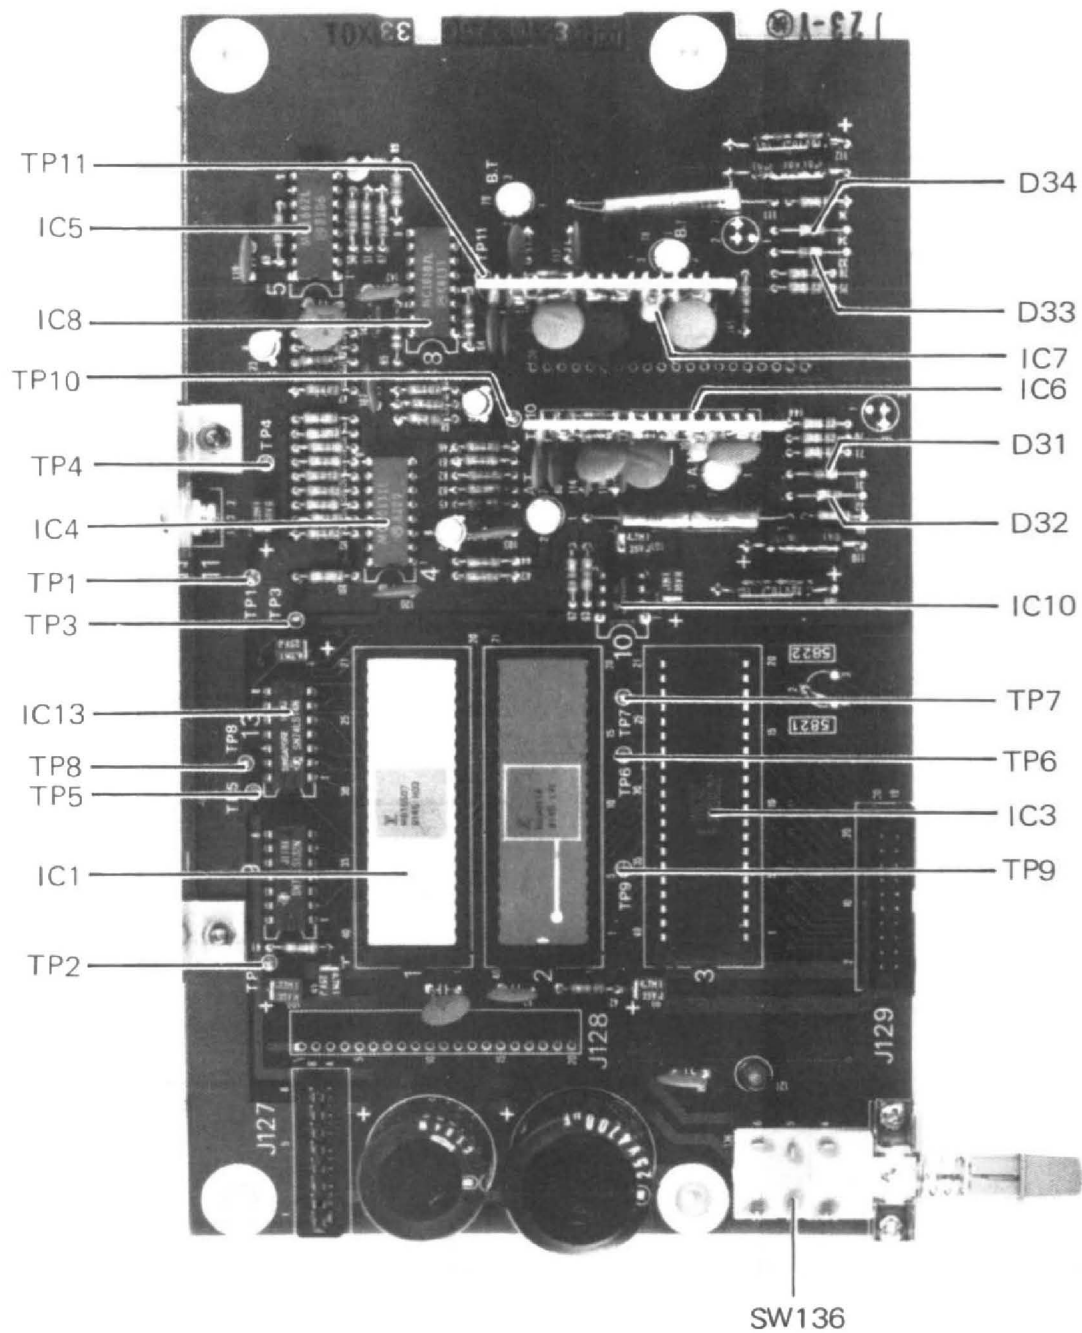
Mother board (BLG-010275) check points (TR5821/5822)
